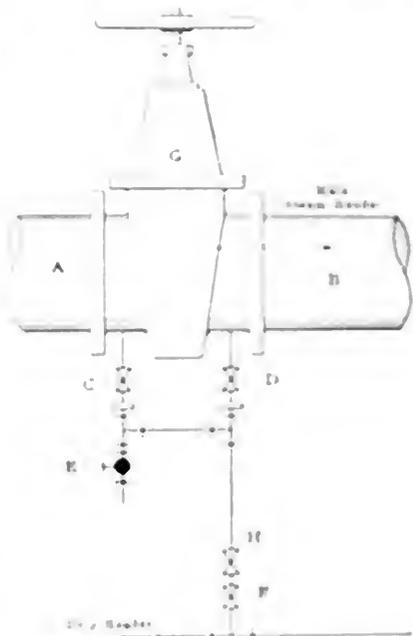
THE SINKING GATE VALVE IN MAIN STEAM HEADER
